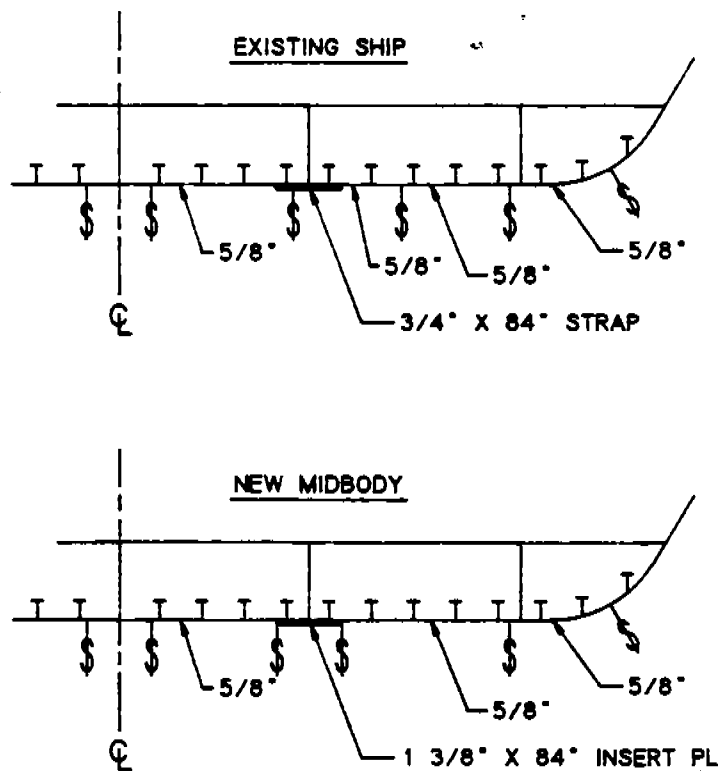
BUTT WELDING OF STRAP TO HEAVY INSERT PLATE ON NEW MIDBODY
